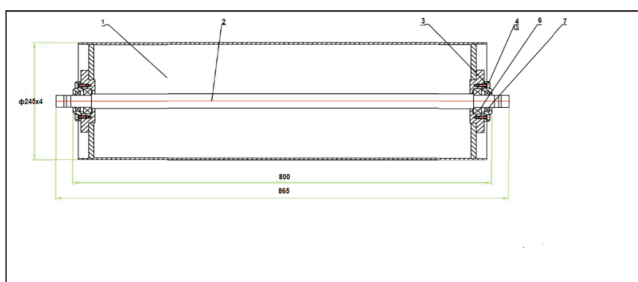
Tamping roller: 1- drum, 2- axis, 3- flange, 4 and 5 connecting bolts, 6- bearing, 7- bearing
